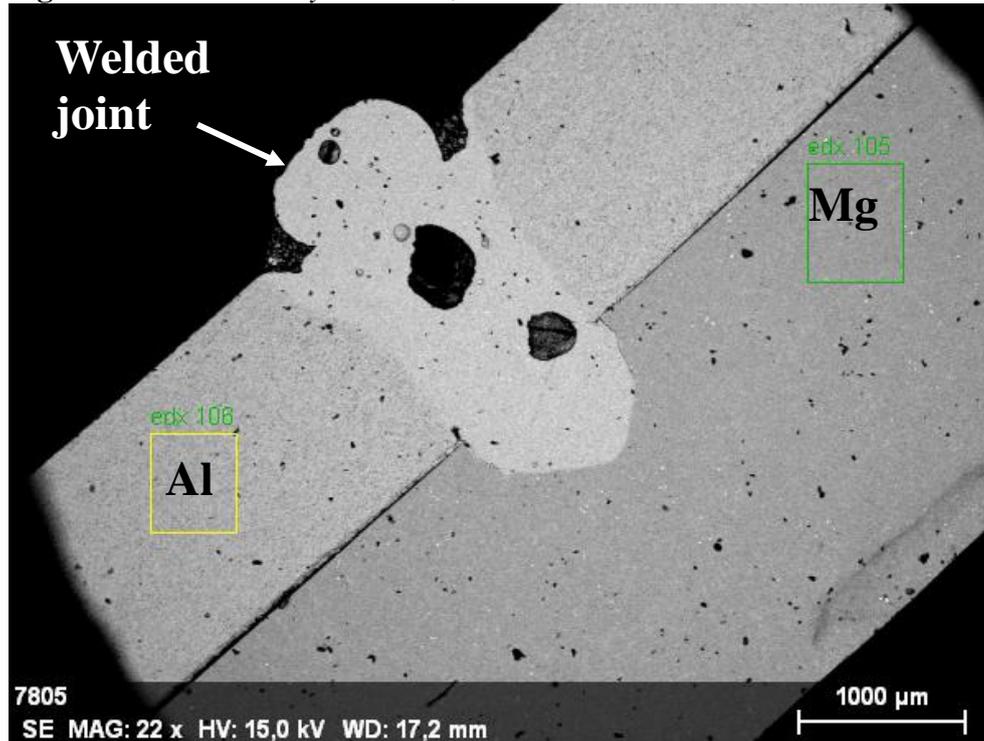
Electron Beam Welded Joint, AM 60, No Filler, Vickers
